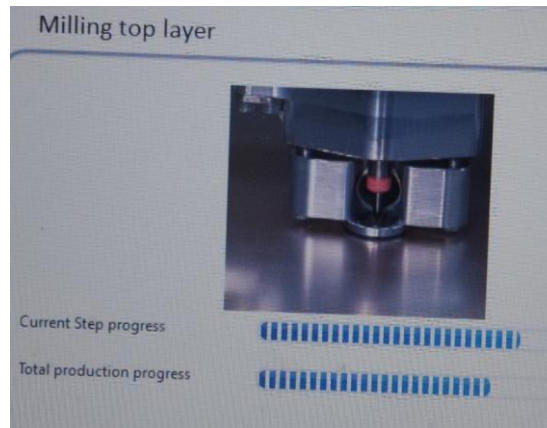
Third step in the fabrication process, where the milling order is executed using the LPKF ProtoMat E33 machine.
